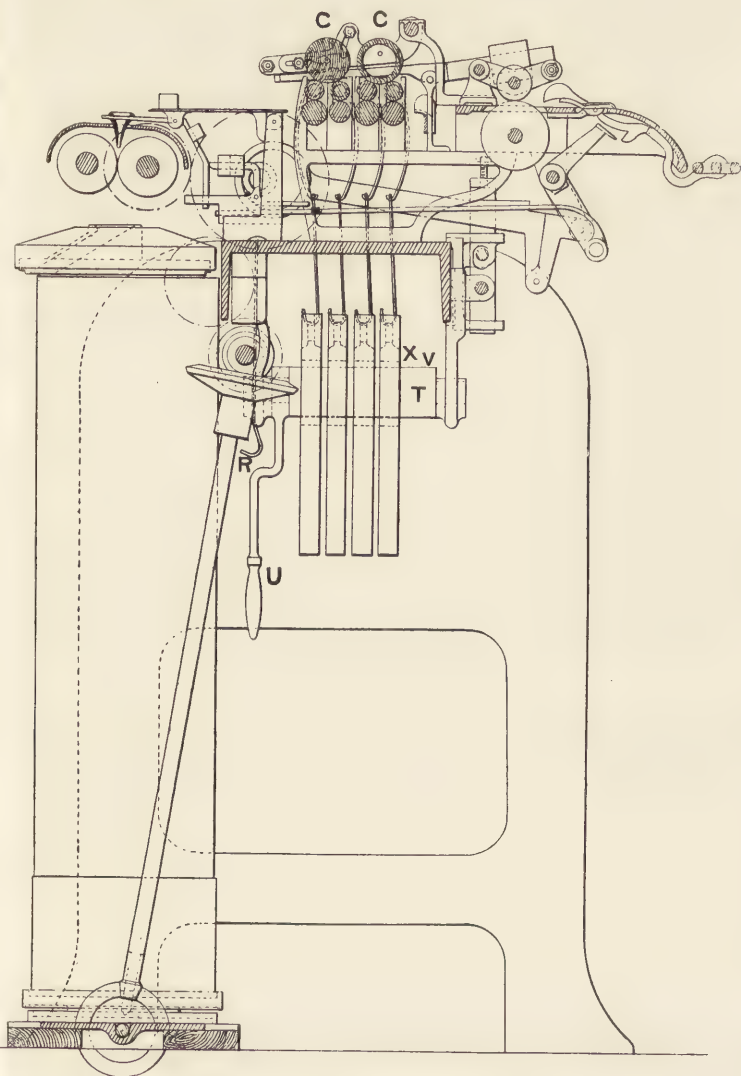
FULL END SECTION OF DRAWING FRAME.
